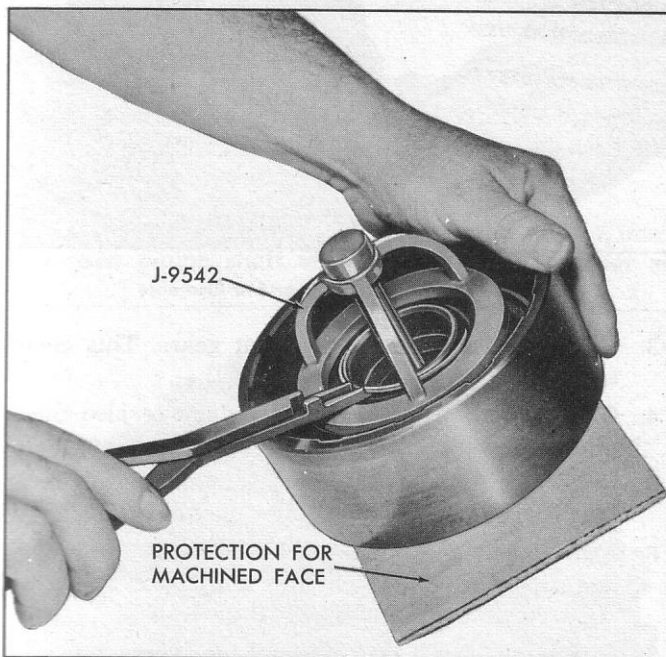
Removing Clutch Spring Retainer Snap Ring
